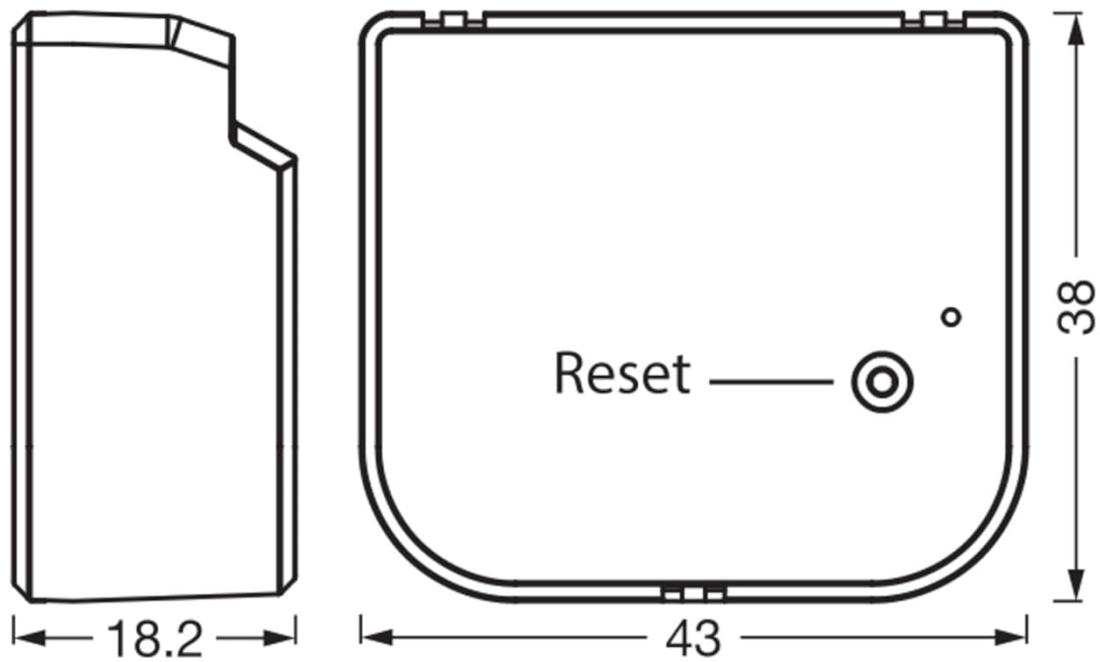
Technical drawing showing the dimensions (43mm length, 18.2mm width, 38mm height) and the location of the reset button on the OSRAM SMART+ WiFi 2-Channel Switch Module.
